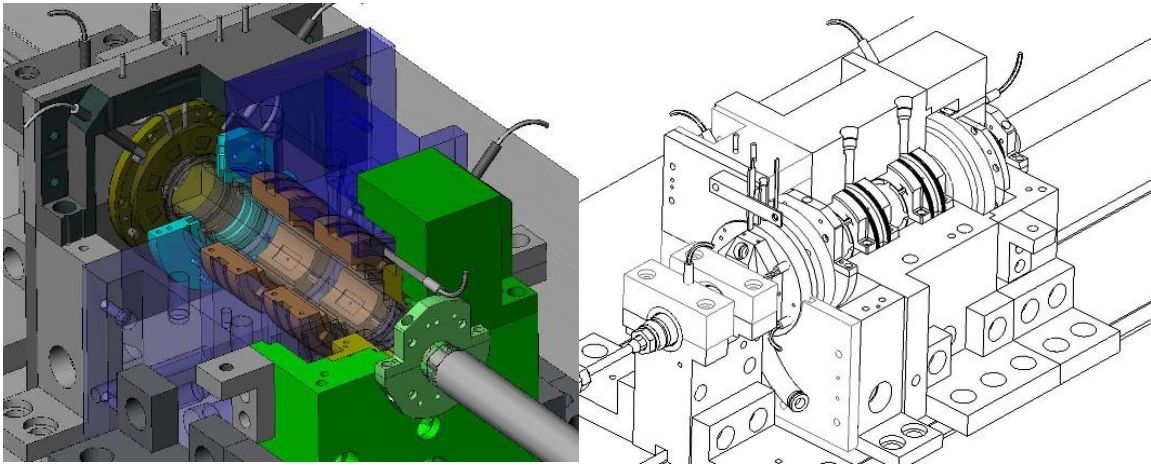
Diametric view (90 degree cross-section) of the test thrust bearing rig. From left to right are the test thrust bearing, large air buffer seal, two journal bearings, slave thrust bearing, and small air buffer seal.
